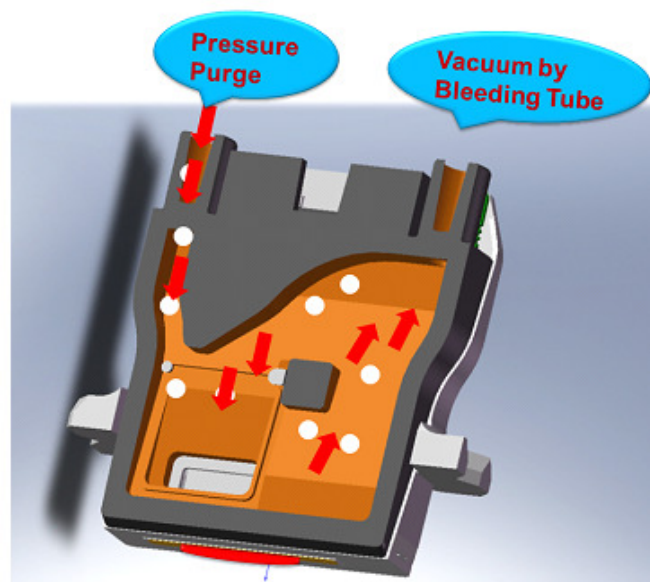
Technique for air removal from the printhead (image shows the cross-sectional view)
